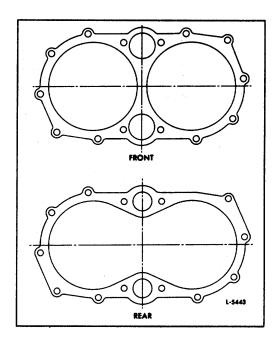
Cover Gaskets for Dual Tube Type Oil Cooler
